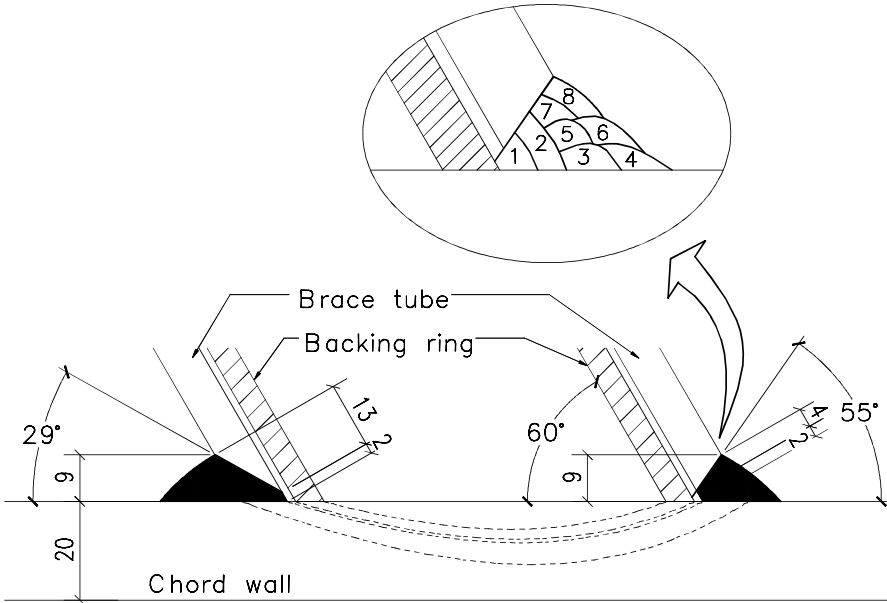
Geometry of weld gap for brace-to-chord connections in S10 and S11. The detail shows welding passes according to the welding procedure specifications.
